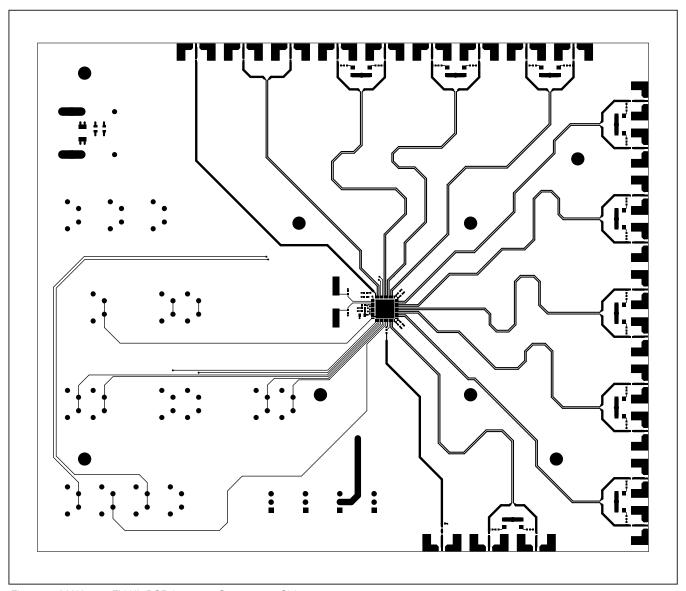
MAX3638 EV Kit PCB Layout—Component Side
